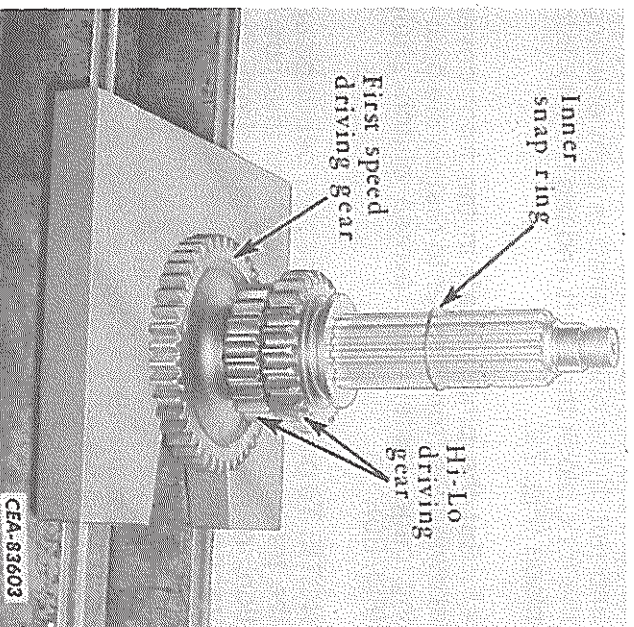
Hi-Lo Speed Driving Gear Installed
